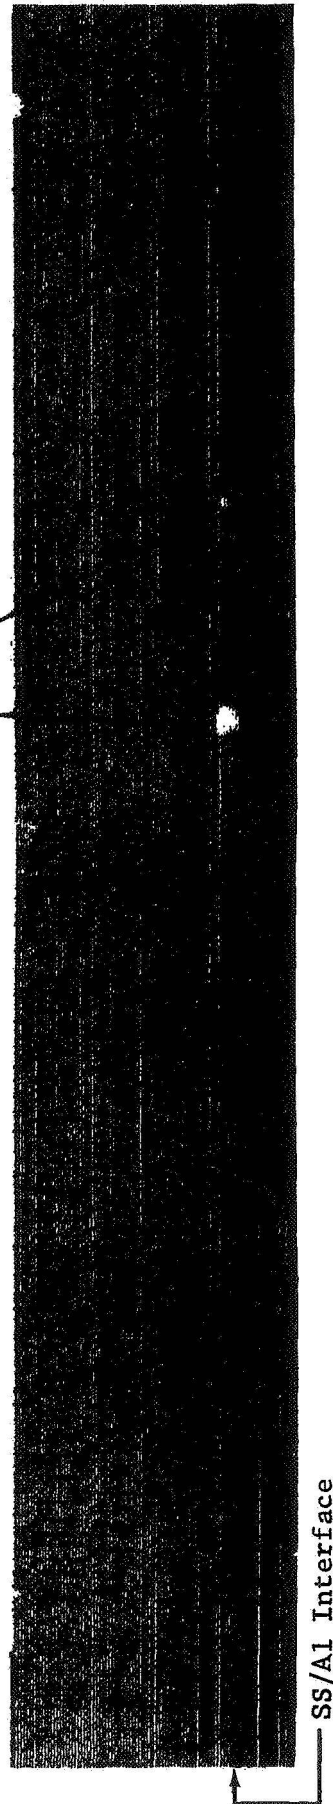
Ultrasonic Inspection Readout of Inertia Welded Joint-10
